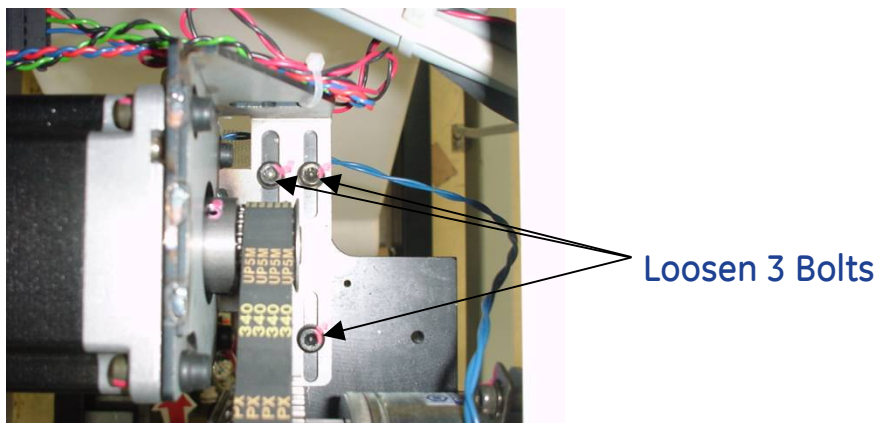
CRADLE MOTOR BELT ADJUSTMENT BOLTS
